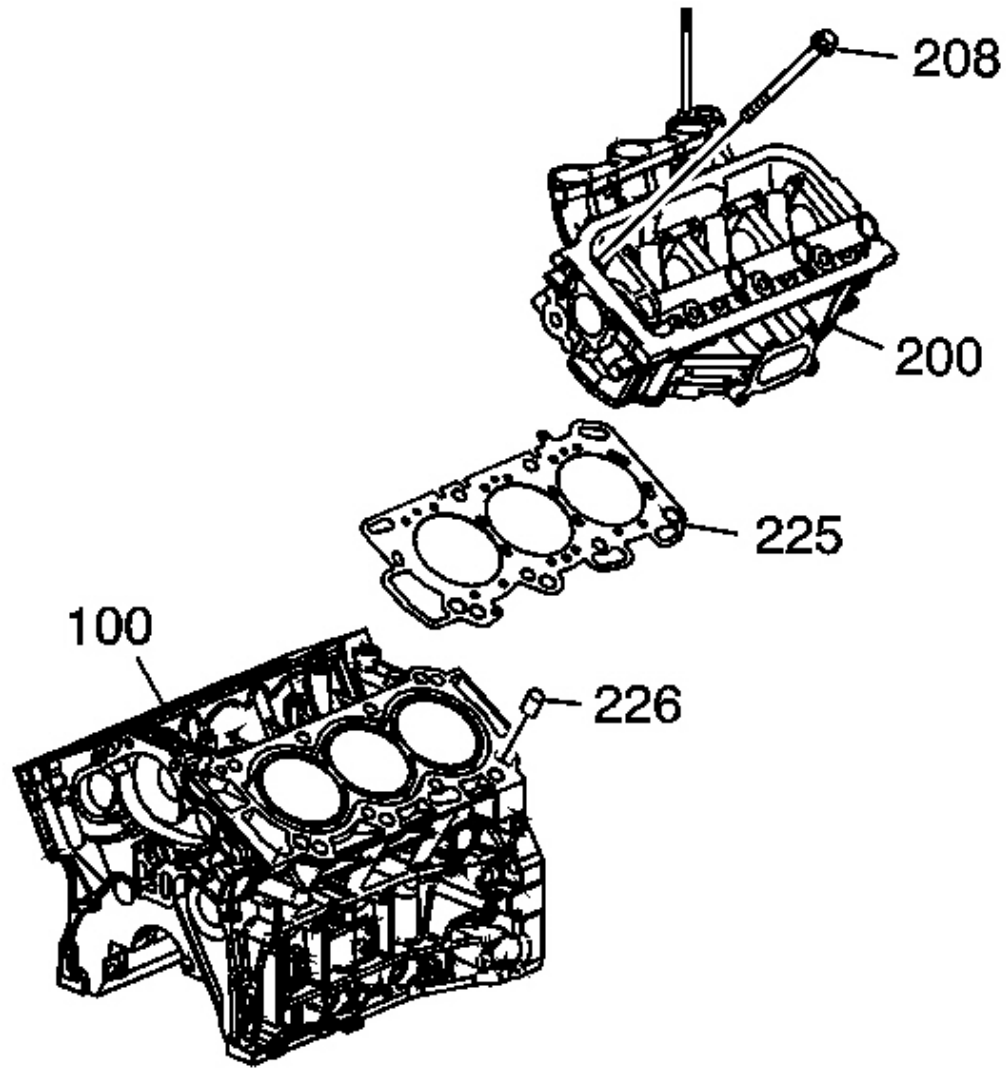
View Of Bolts, Cylinder Head, Gasket & Pins
